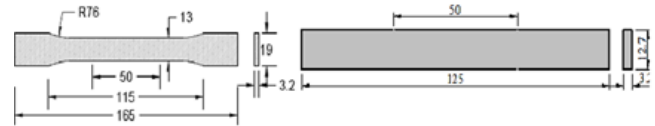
Specimen standards : (a) Tensile test and (b) Flexural Test
